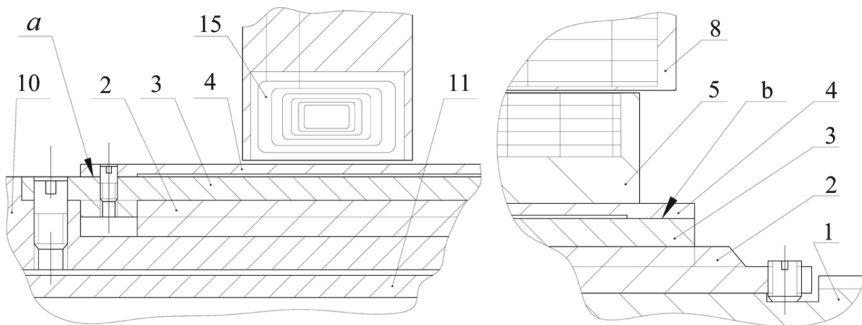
Fragments of the drive of the clamping mechanism with locations of the fixed “a” and movable “b” support surfaces of the deformable element.
